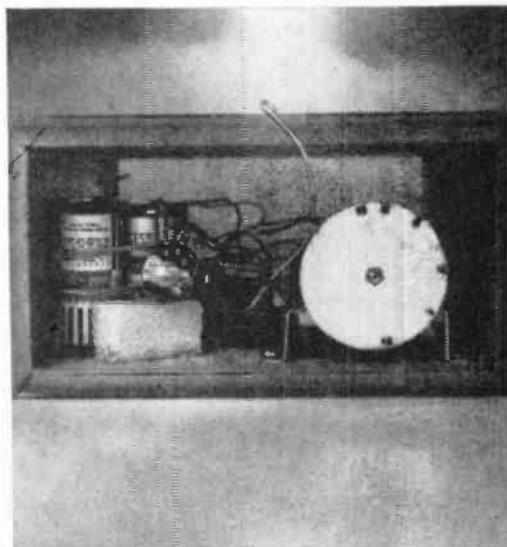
Assemble cabinet on base. Note block which holds batteries.
